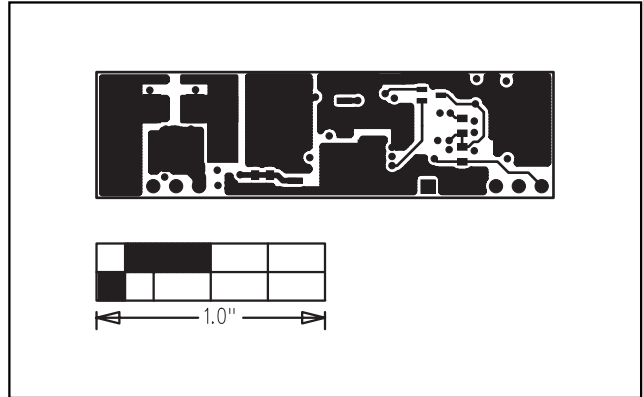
MAX5065 EV Kit PC Board Layout—Top Layer
